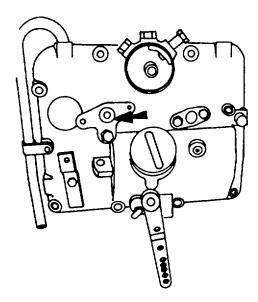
Copper Washer and Barrel (Flange Removed)
